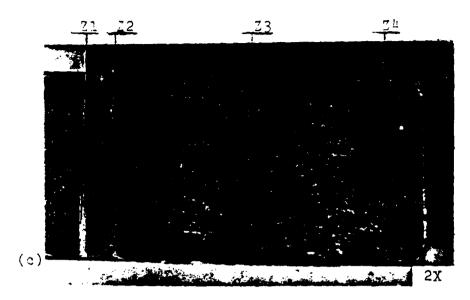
c. The enlarged macrographs of the test specimen seen in Figure 2, shows four different fractures, Z1-machined V-notch, Z2-fatigue precrack, Z3-methanol environment stress cracking and Z4-tensile fracture.
